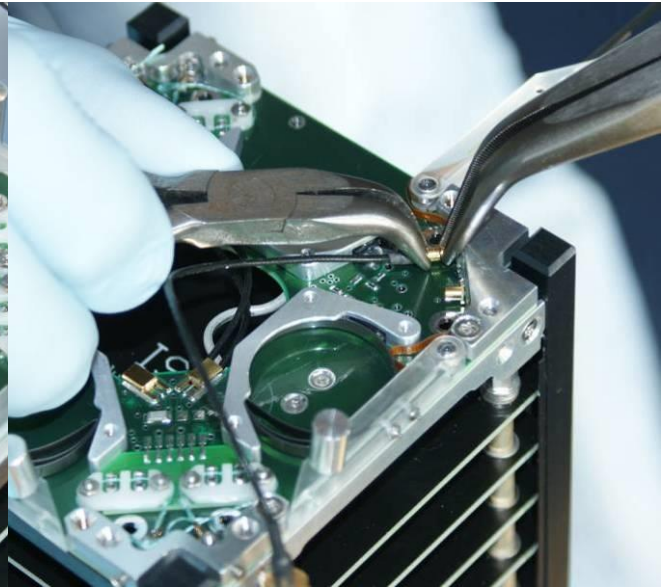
Mating of flex-rigid PCB connector for monopole configurations
